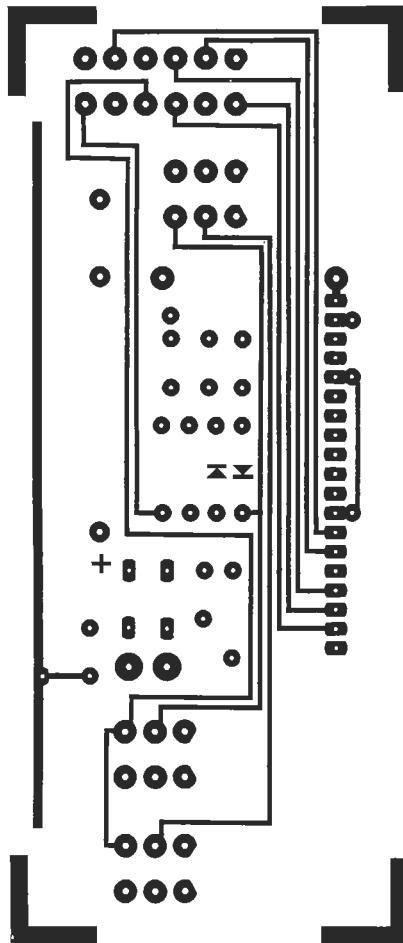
BACK BOARD component side has this foil pattern (also full-size). Plated-through holes connect front and rear foils.
